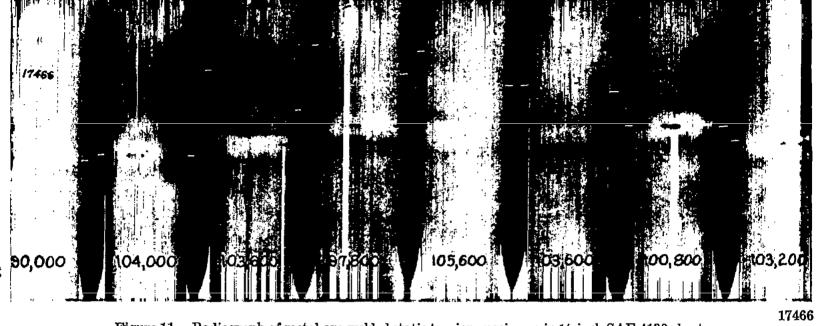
Radiograph of metal-arc-welded static tension specimens in 1/8-inch SAE 4130 sheet.
